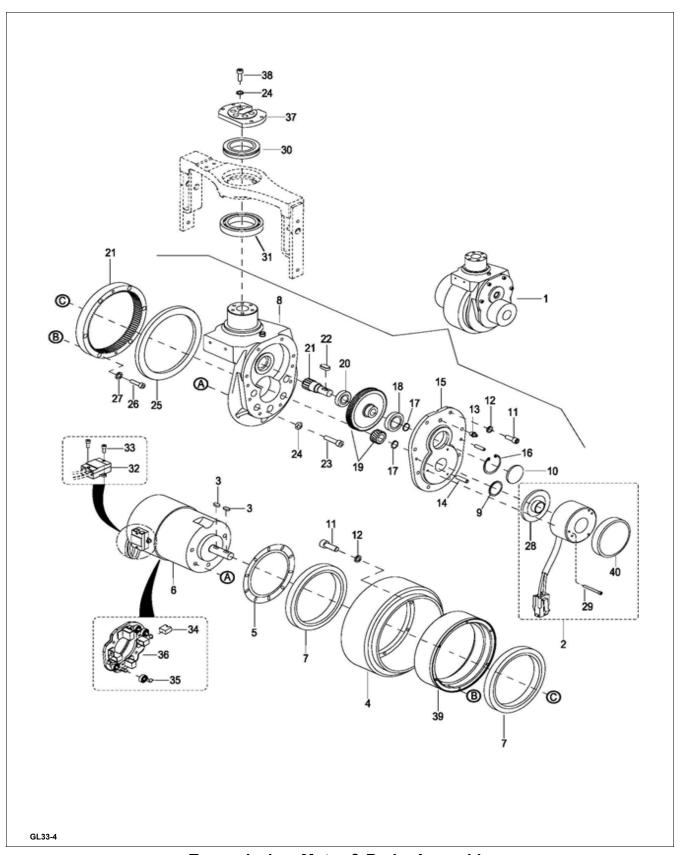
Transmission, Motor & Brake Assembly - Continued
